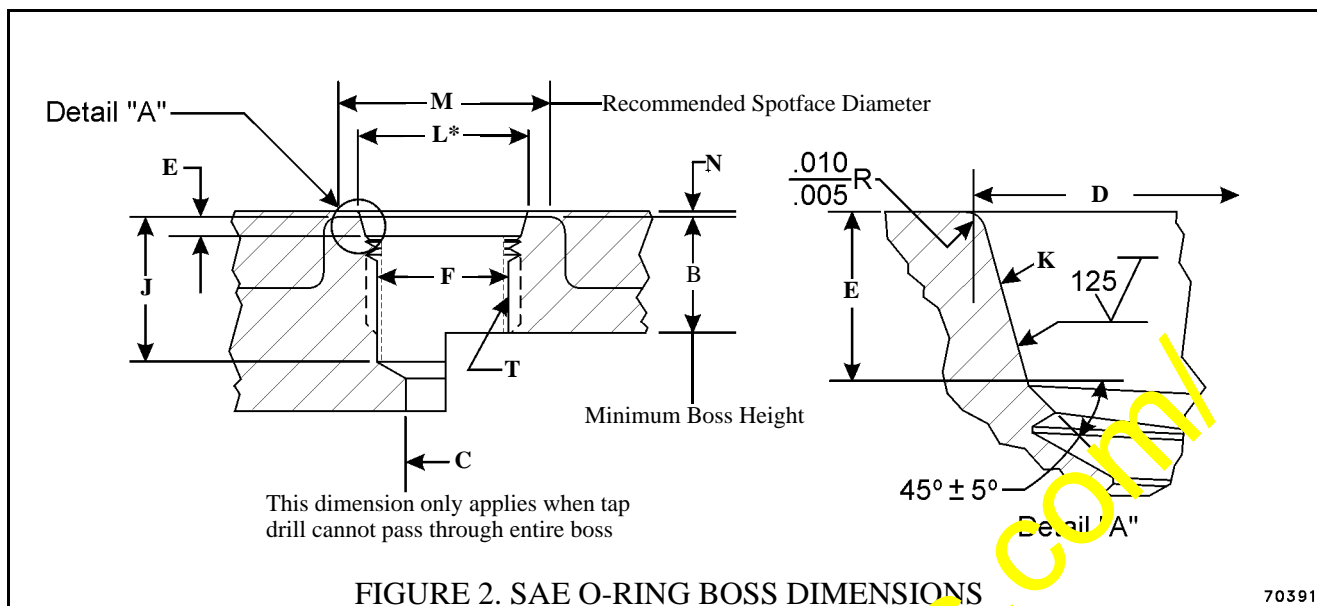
SAE O-RING BOSS DIMENSIONS
